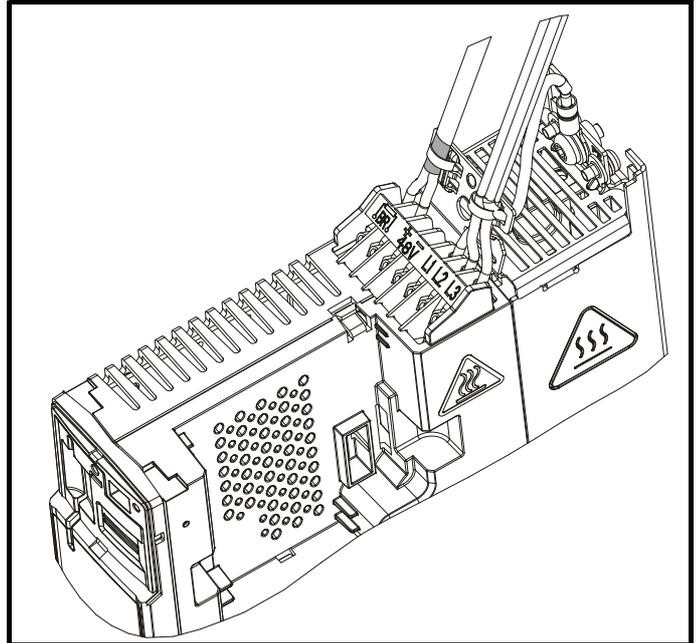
Installation of grounding clamp (size 1 and 2)
